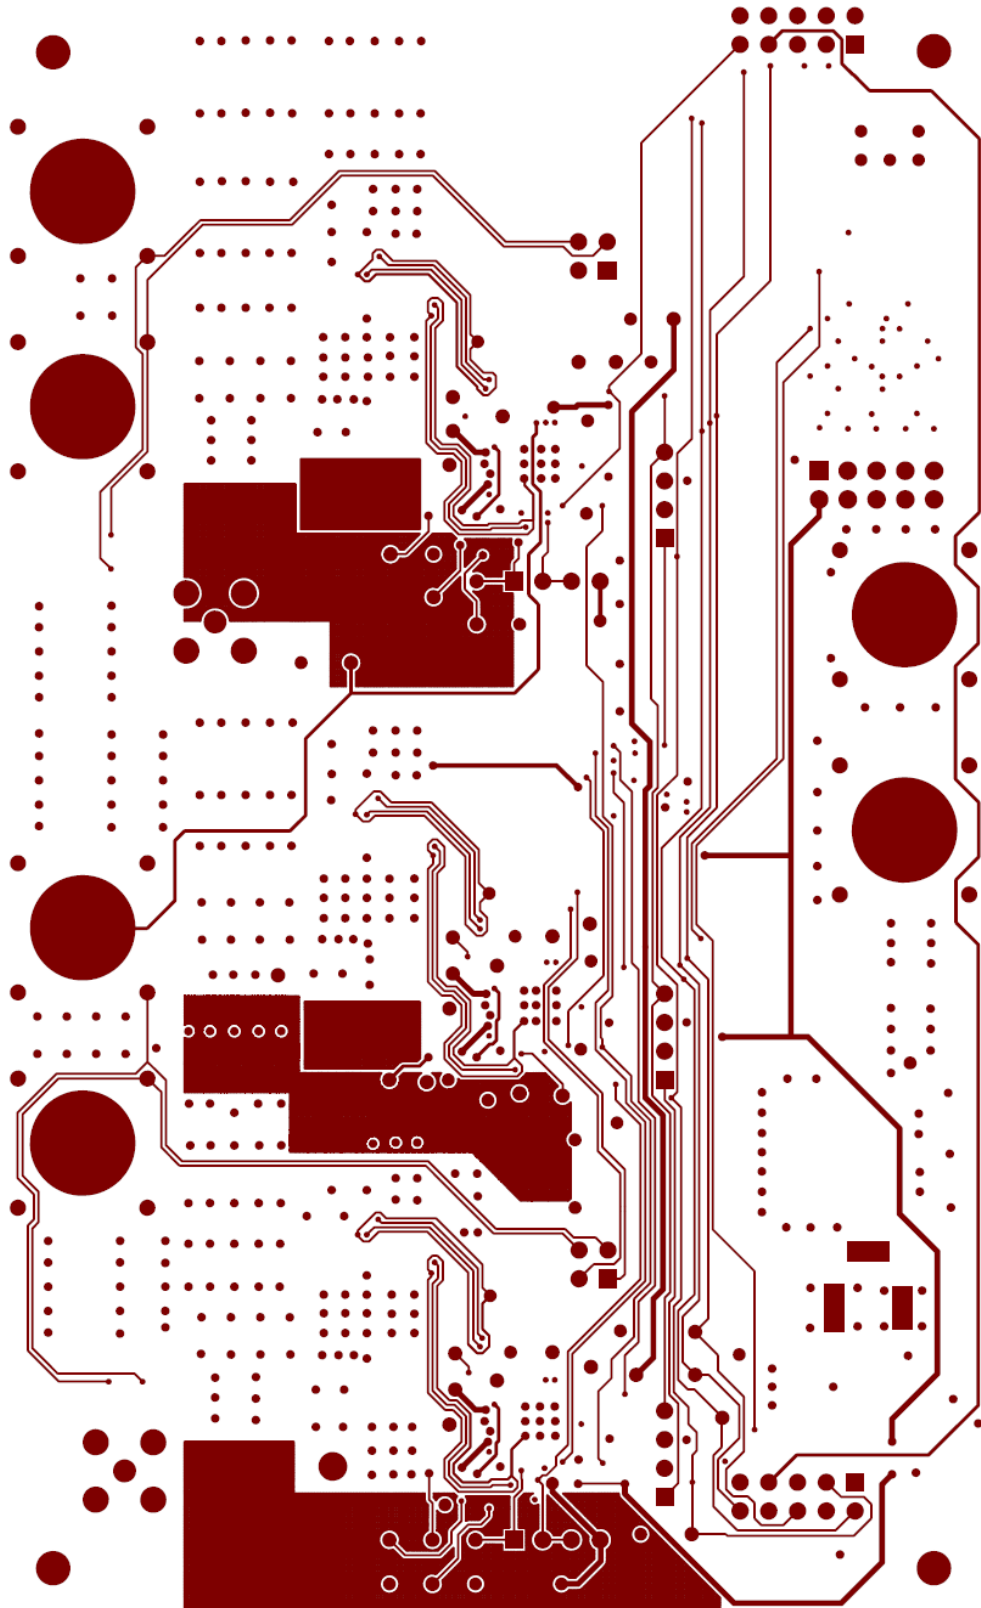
PCB – INNER LAYER 2 (VIEWED FROM TOP)
